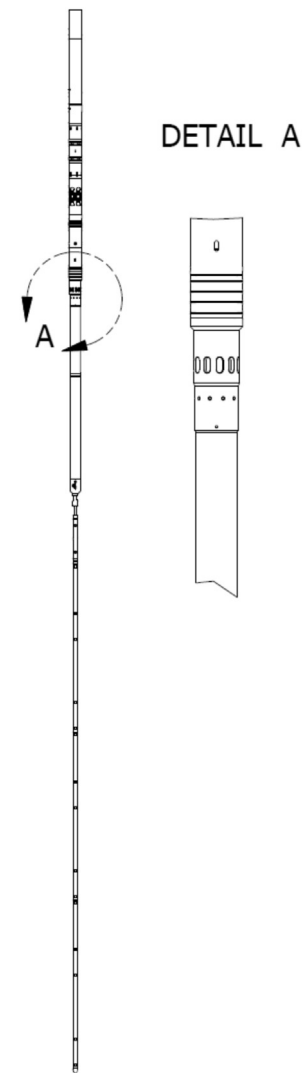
Downhole assembly for shut-in valve (Qinterra Technologies AS).
